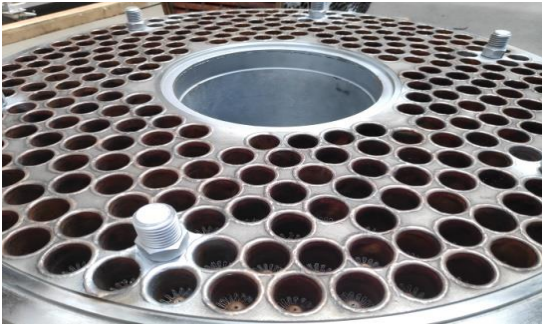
The 288 pipes on the tubular plate after the manual GTAW welding
